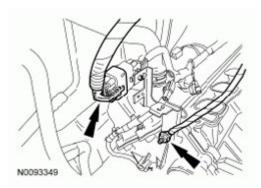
Identifying Fluid Level Indicator And Rear Heater Hose Hanger Courtesy of FORD MOTOR CO.
